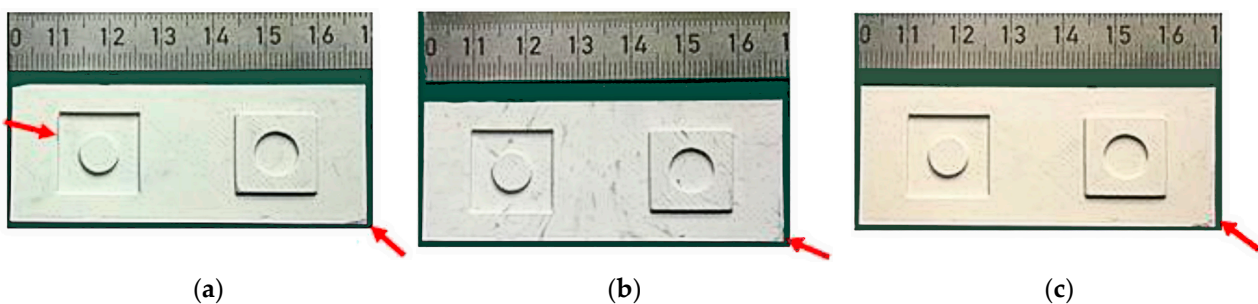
Visual Inspection of replicated parts (ceramic series 3): (a) part 1; (b) part 4; (c) part 5. Defects are marked by red arrows.
